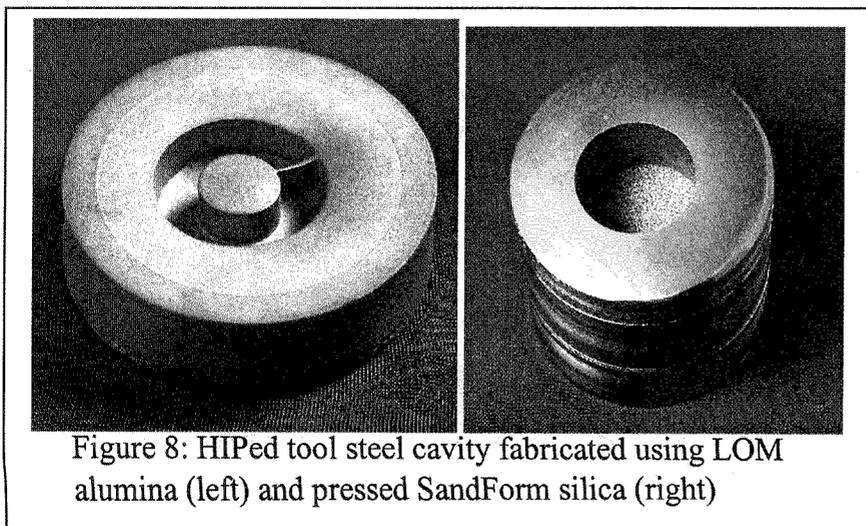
HIPed tool steel cavity fabricated using LOM alumina (left) and pressed SandForm silica (right)
